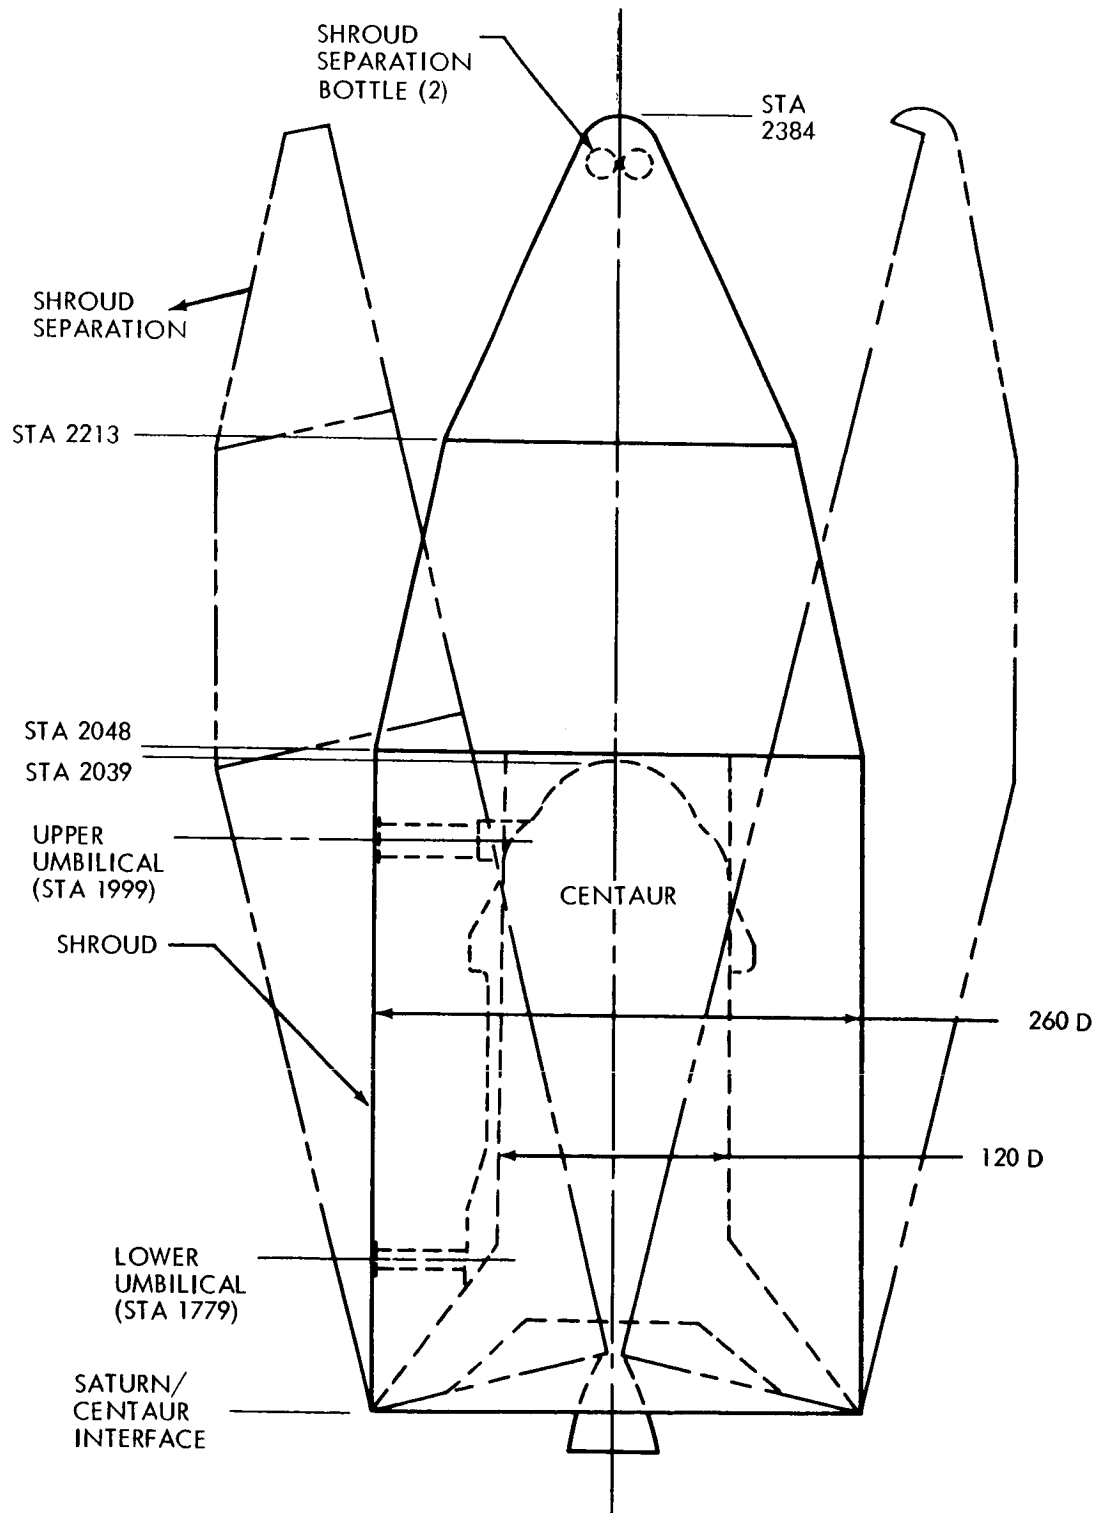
Centaur Shroud & Payload Fairing Assembly
